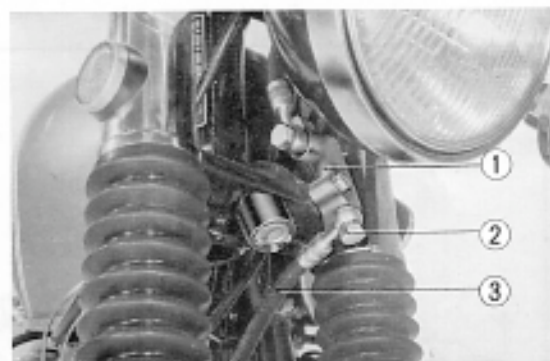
① Oil joint ② Oil joint bolt ③ Brake hose
